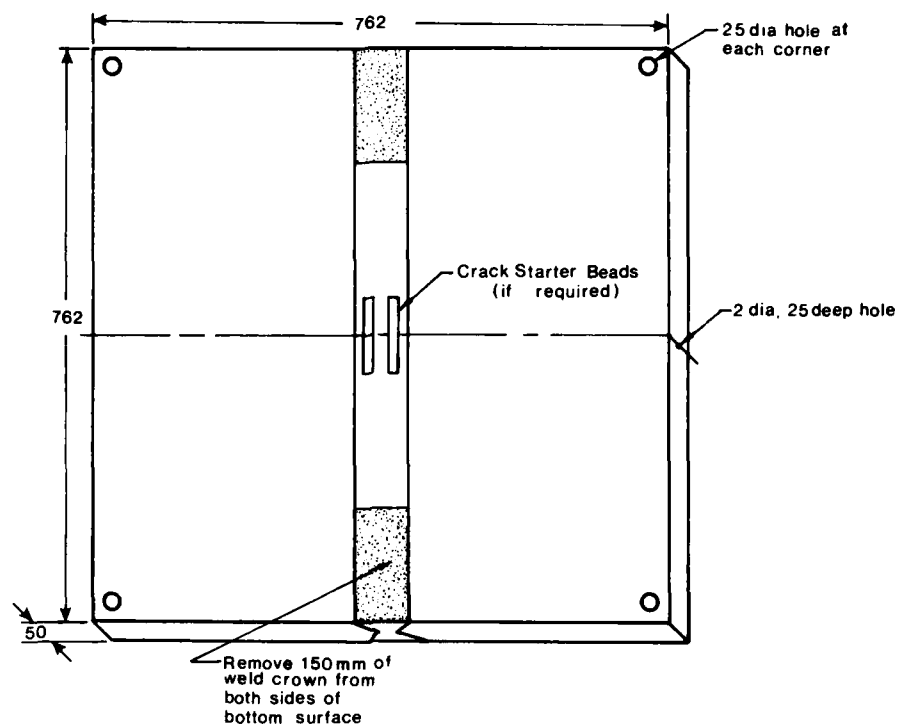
Design of explosion bulge test plate. Crack starter beads are only required for crack starter tests. Dimensions are in mm.
